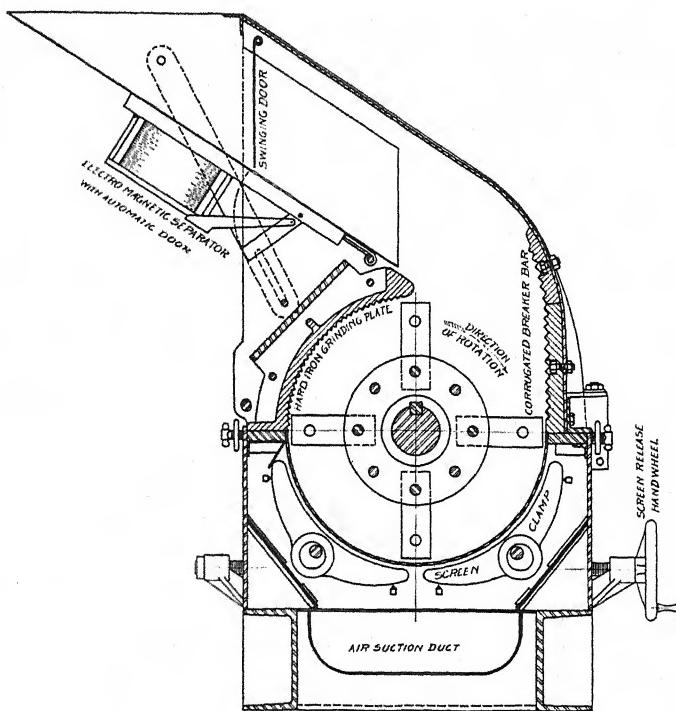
Sectional view of a hammer mill. (Courtesy Robinson Mfg. Co., Muncy, Pa.)
